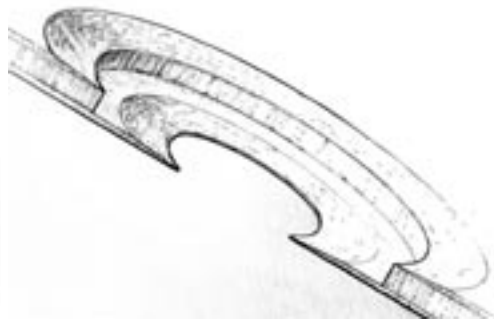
Grind a 12-to-1 bevel around the edge of the inner and outer skins.
